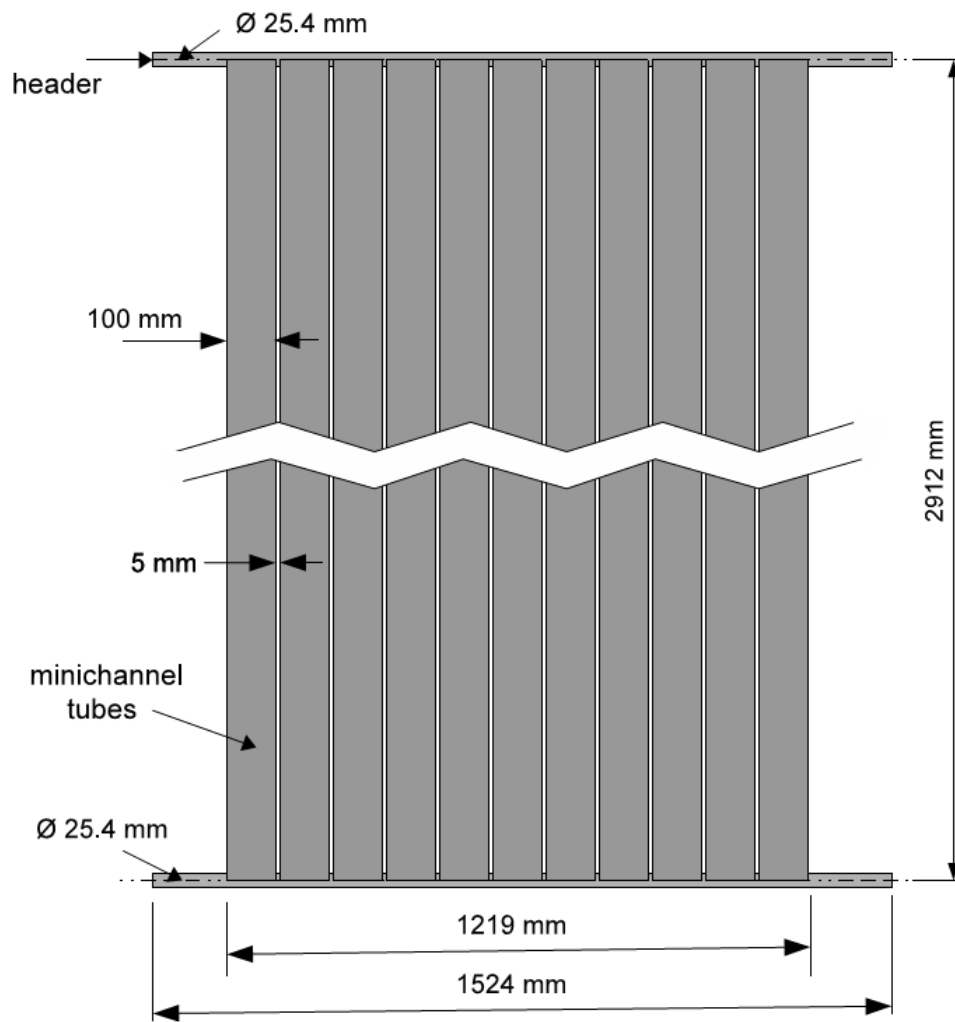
Dimensions of the aluminum-based minichannel tube solar collector.
